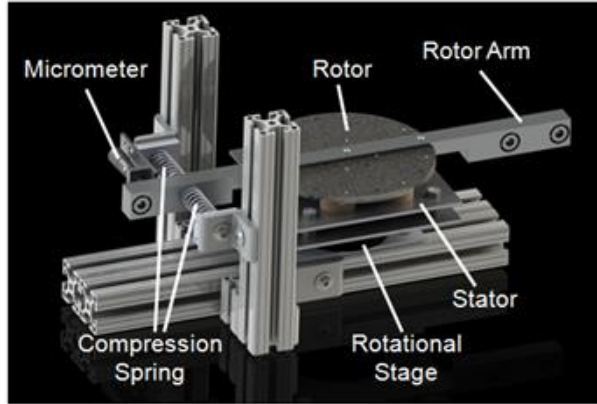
CAD mechanical assembly to measure DSSM torque
